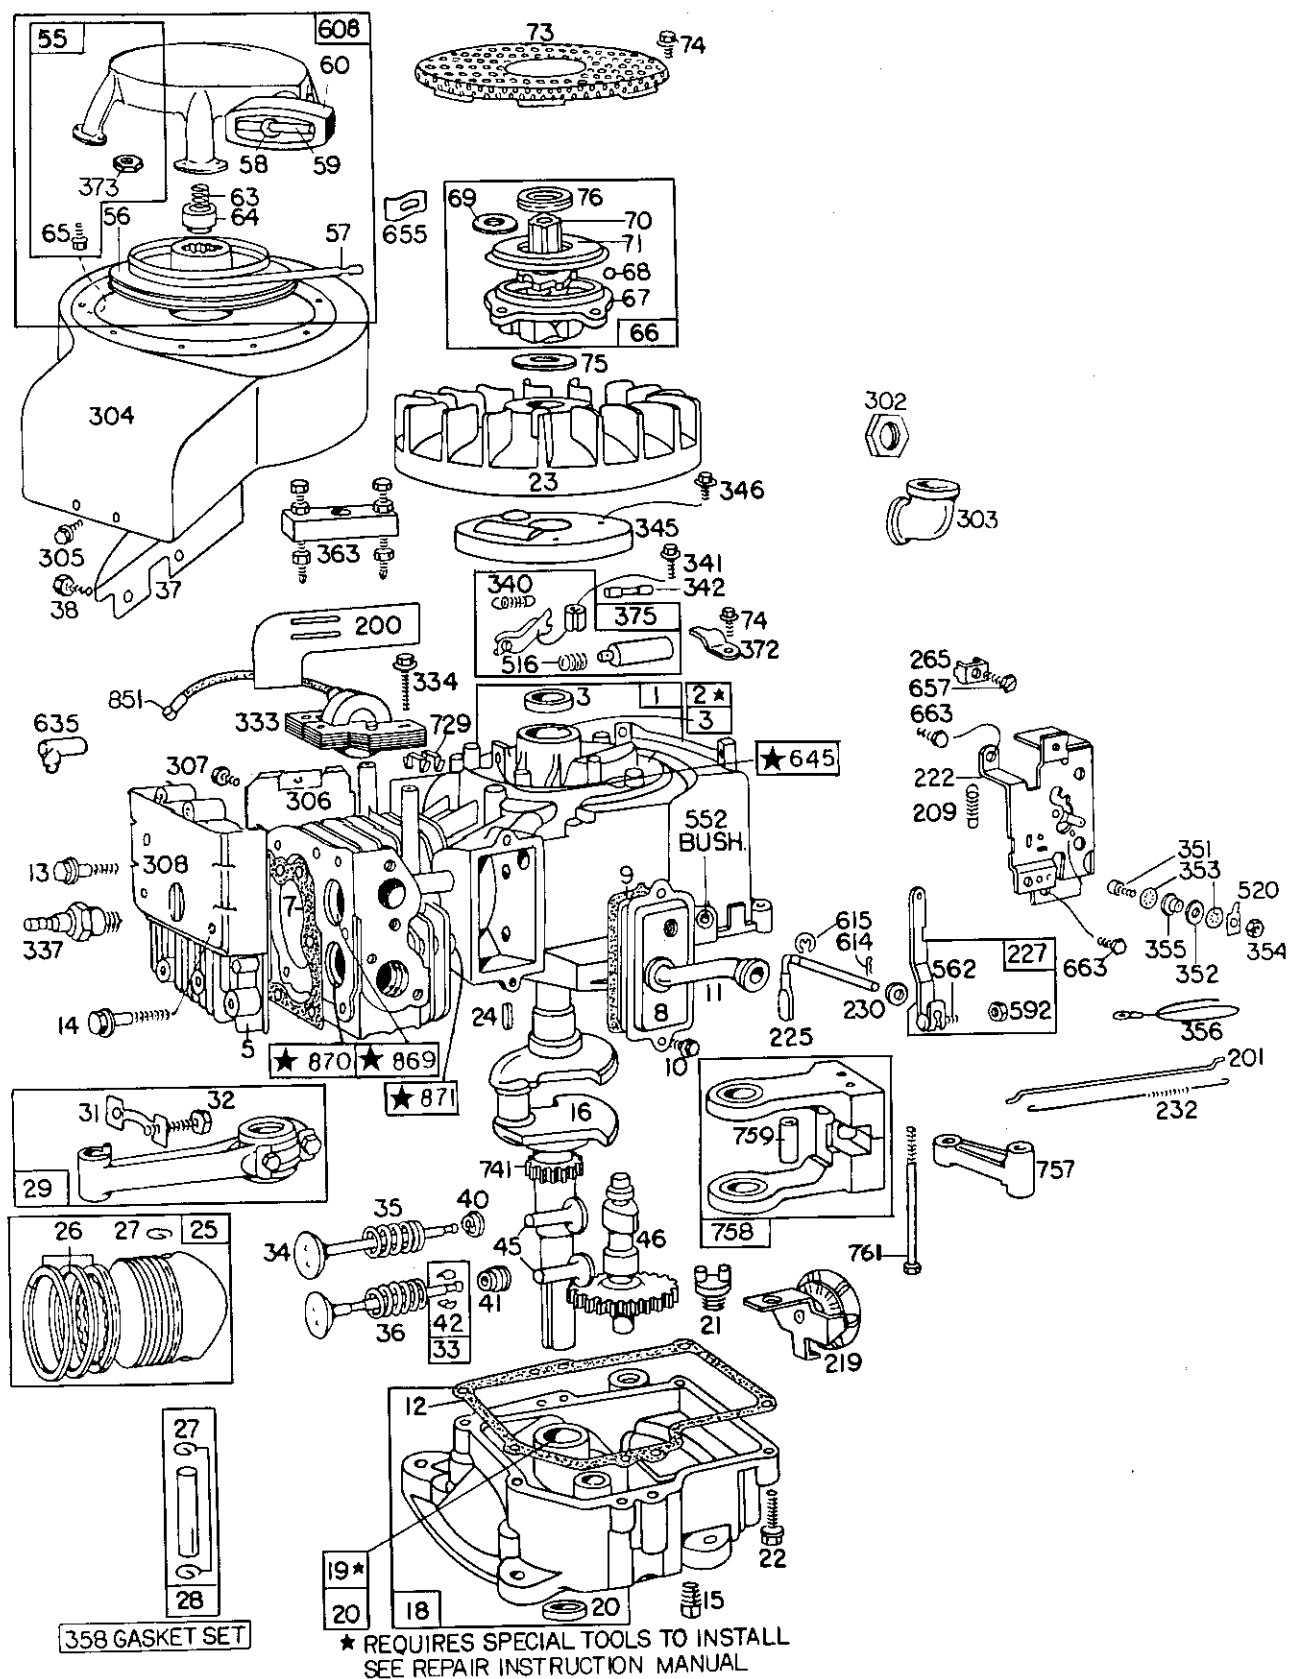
MODEL 812 (BRIGG'S & STRATTON ENGINE ASSEMBLY 191707-5650-01)
